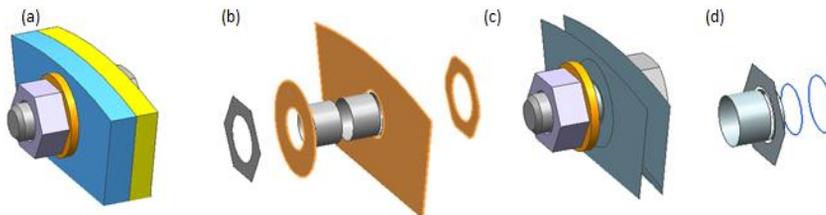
(a) 3D fastened plate assembly; (b) Interfaces in 3D fastened plate assembly; (c) Mid-surface representation of fastened plate assembly; (d) Interfaces in reduced dimension fastened plate assembly.
